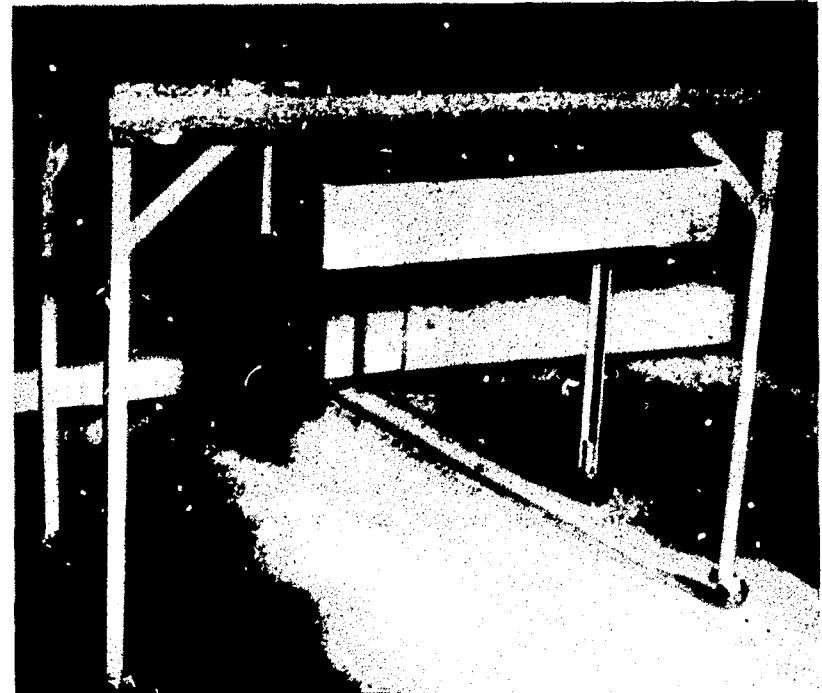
Portable acetylene welding and cutting table. See Equipment Plan No. 6. Note slag pan.
